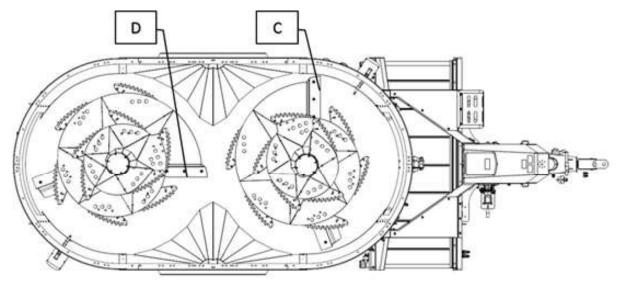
Synchronizing the Mixing Augers (Two Augers)
